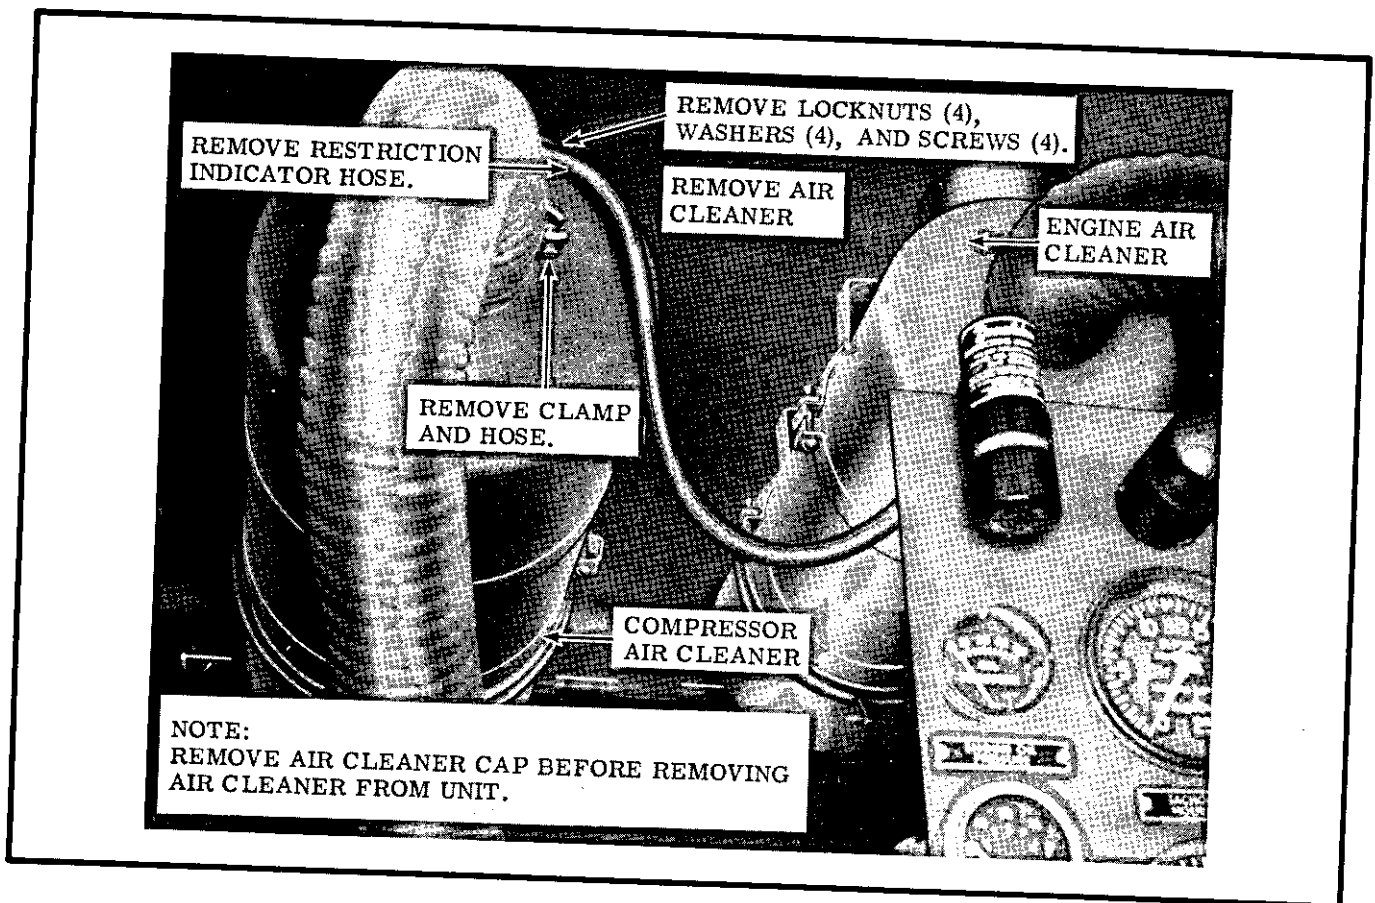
Compressor Air Cleaner and/or Engine Air Cleaner, Removal and Installation
